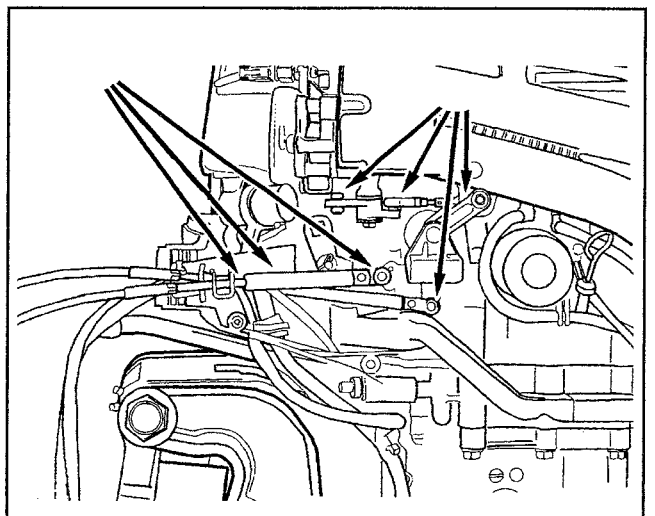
Shift and throttle linkage lubrication - 40/50 hp (815cc) 3-cylinder, 4-stroke motors
